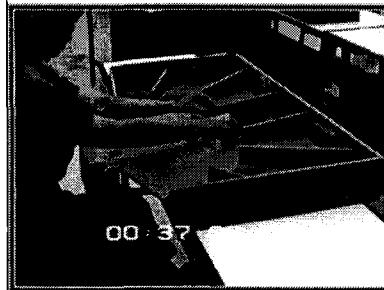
Reach for bolts, grasp and move through the air to fixtures.
